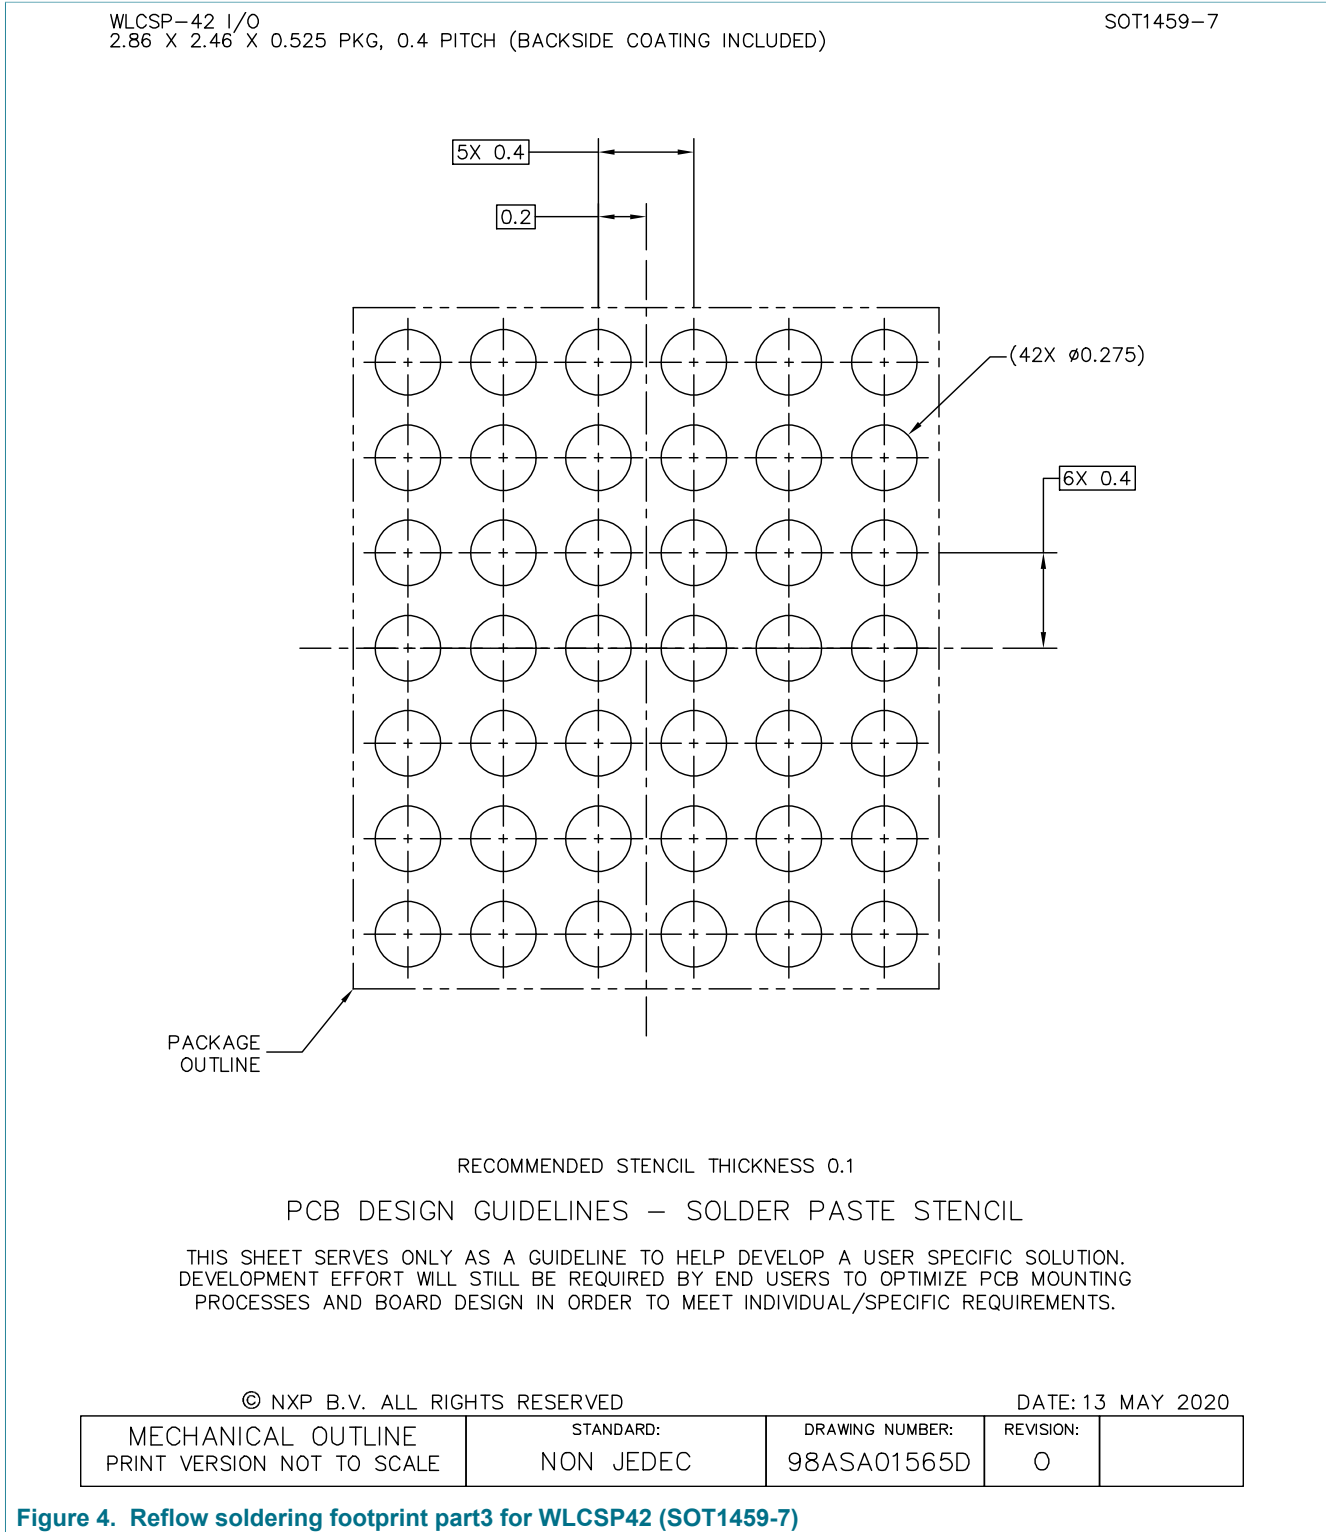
Reflow soldering footprint part3 for WLCSP42 (SOT1459-7)
